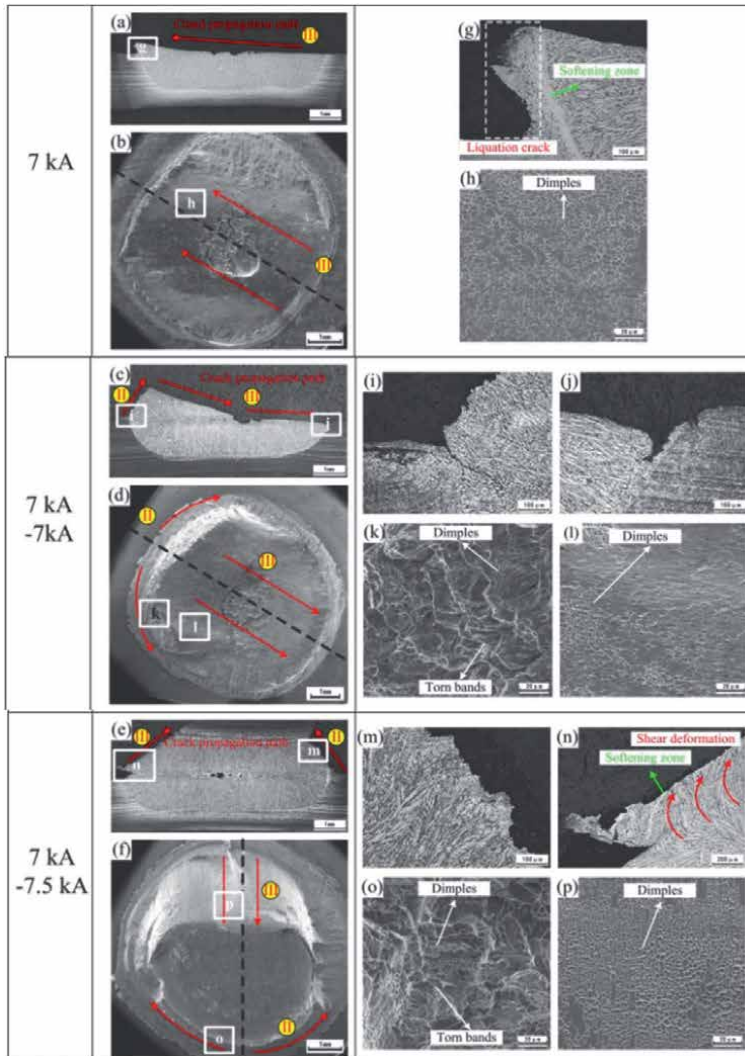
Typical fracture modes in TSS tests: (a)–(f) are fracture surfaces and cross-sections; (g)–(p) are magnified images located at locations (g)–(p), respectively [24].
